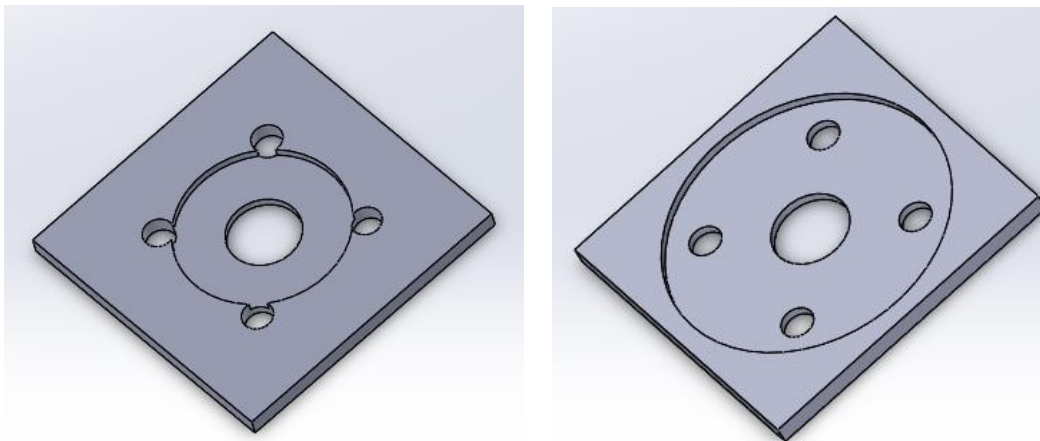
Spring mounts for the 28 (left) and 44 (right) diameter springs
